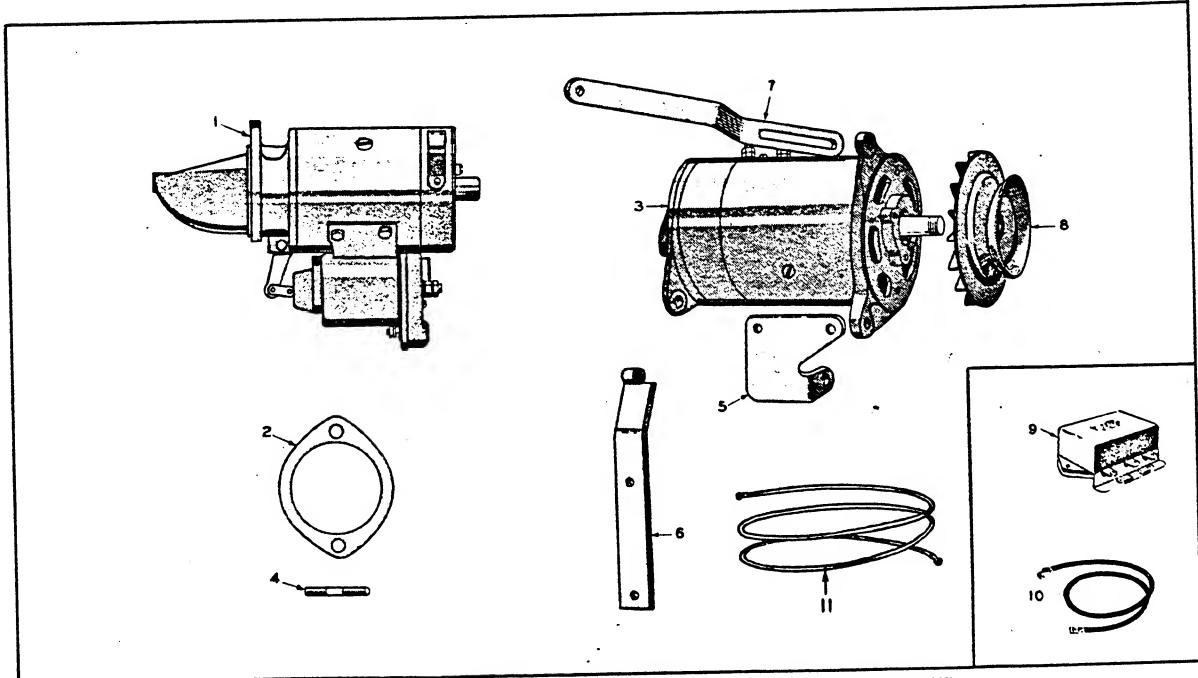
STARTING MOTOR & BATTERY CHARGING GENERATOR GROUP
